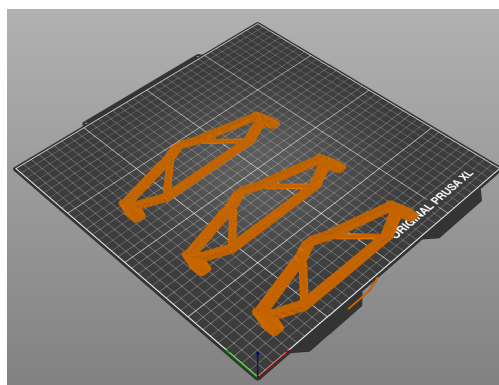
Tape welding g-code added at each layer with tapes
